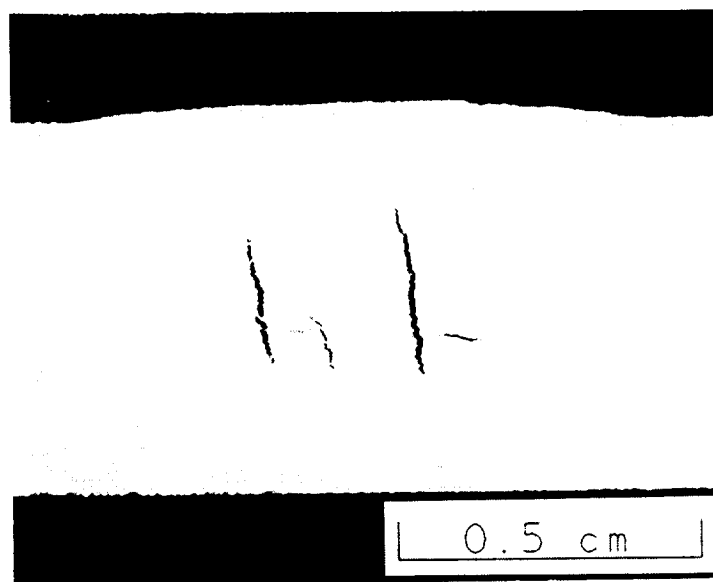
Sub-surface Cracking in a Transverse Weld Section - 4.7 cm Diameter Specimen
